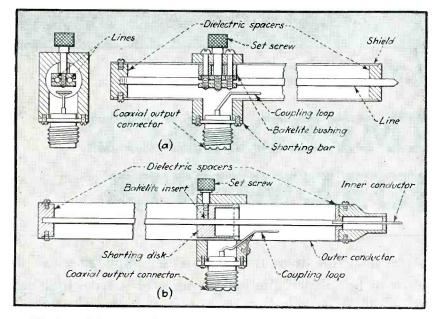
(a) Balanced u-h-f probe construction provides a movable shorting bar and a pickup loop assembled inside a shield. (b) Coaxial probe is similarly constructed, with shorting disk and pickup loop inside the outer conductor of the probe
